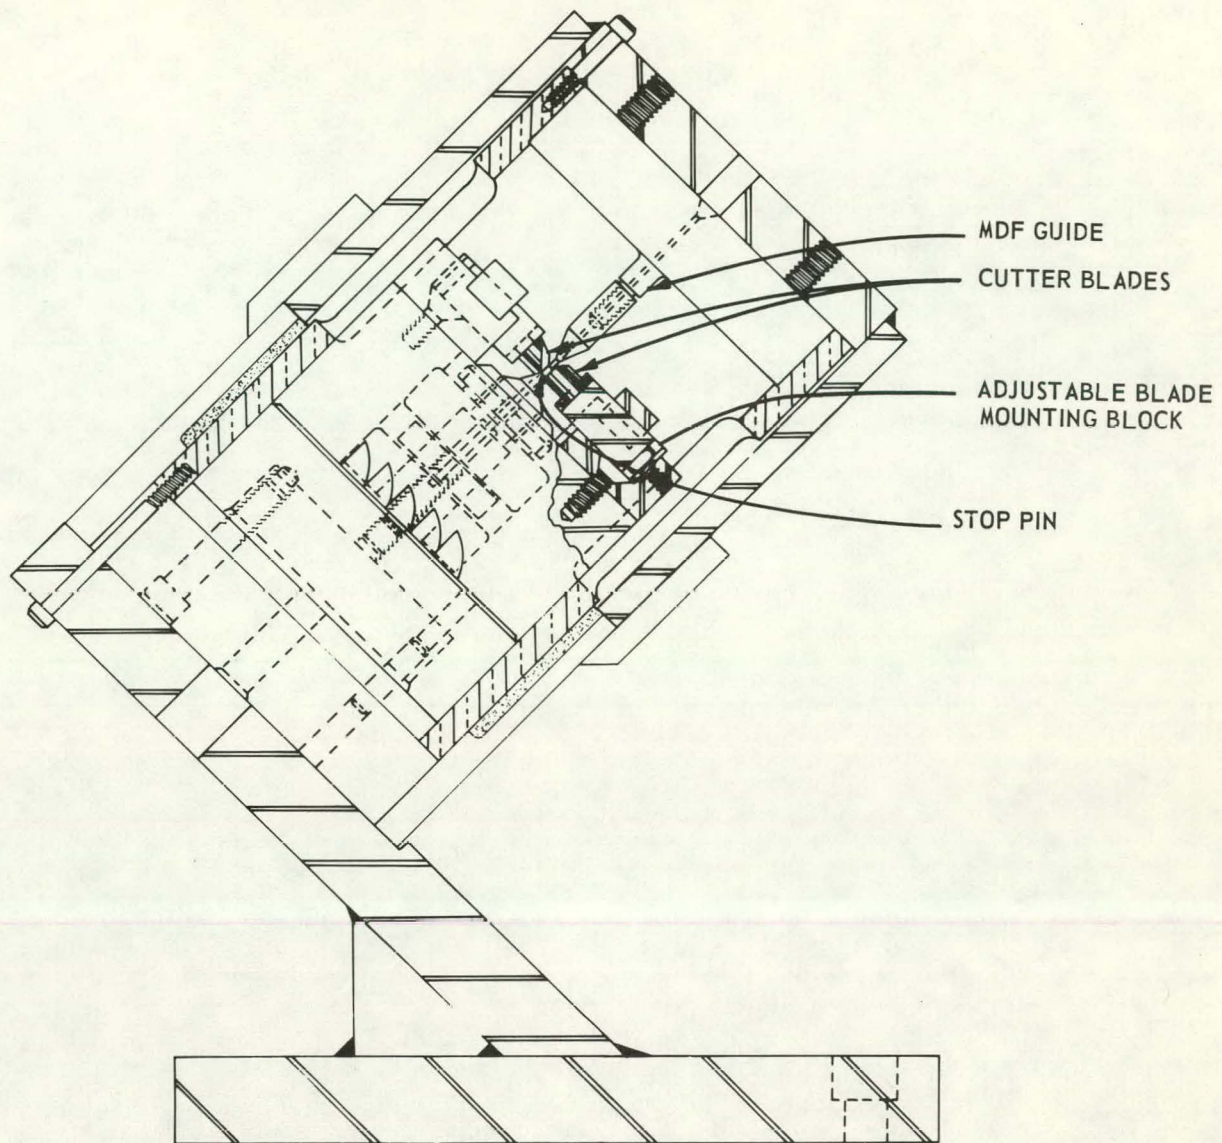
A cross-section of the semiautomatic deburring tool shows major components of the design.
